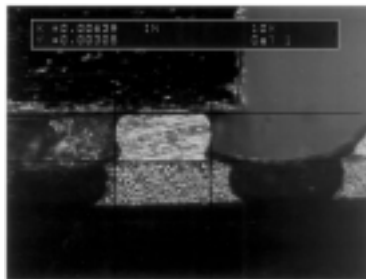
Micro SMD Solder Joint on SMD Pad
